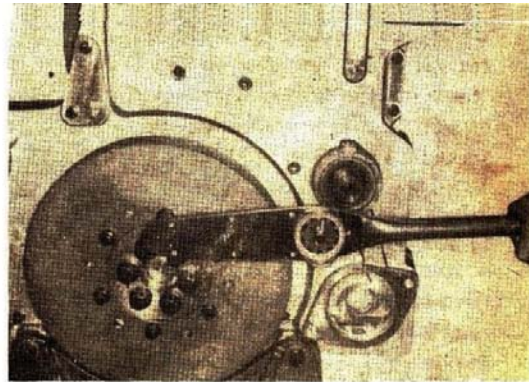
, Tighten the vibration damper to crankshaft adapter
